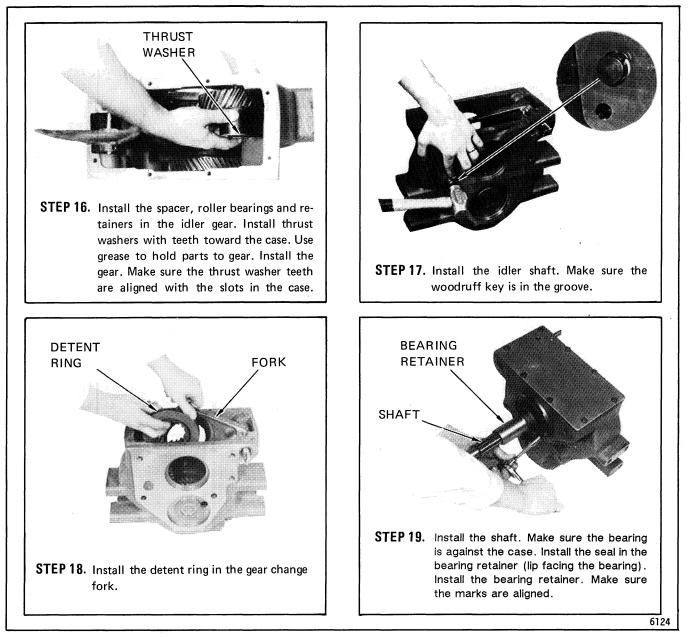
ASSEMBLY OF TRANSMISSION (Sheet 5 of 6)
